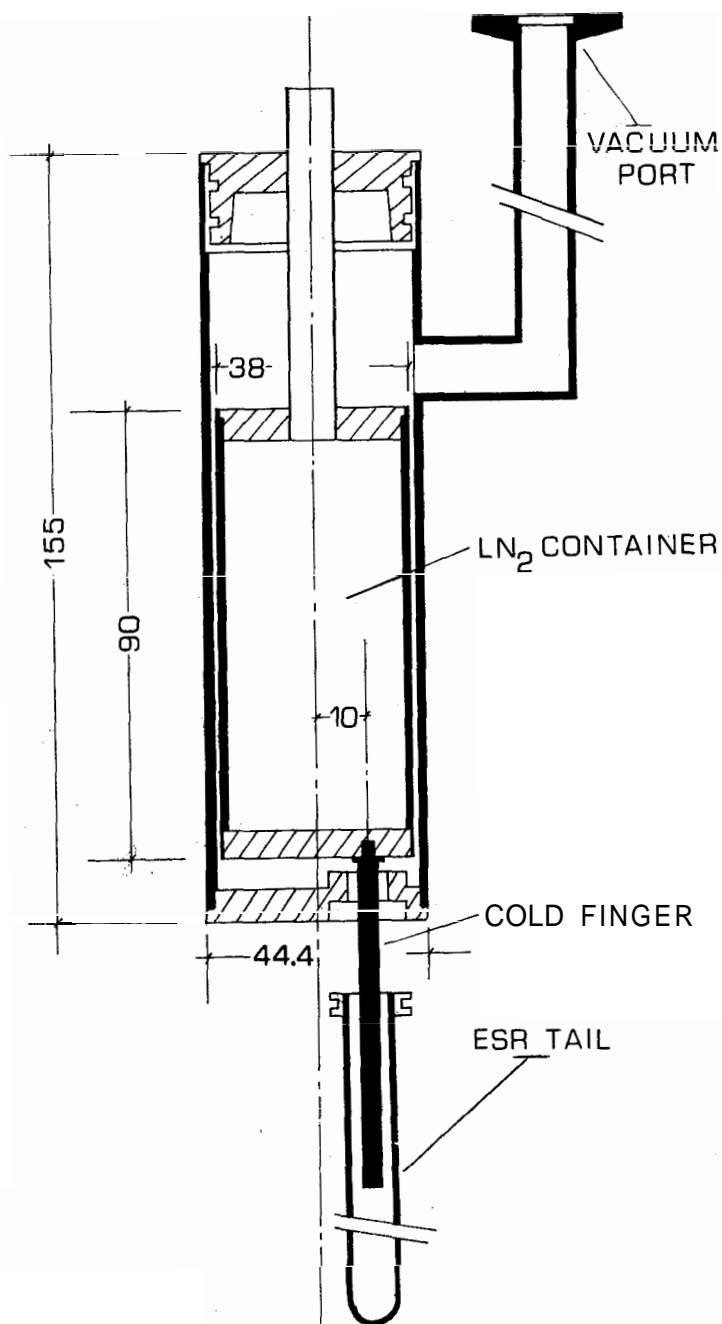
Detailed drawing of the dewar. All dimensions are in mm.
